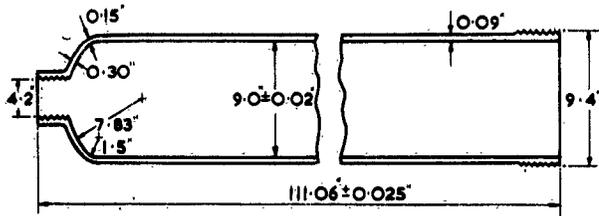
Tapered tube produced by further deep drawing of Buzzard tube
